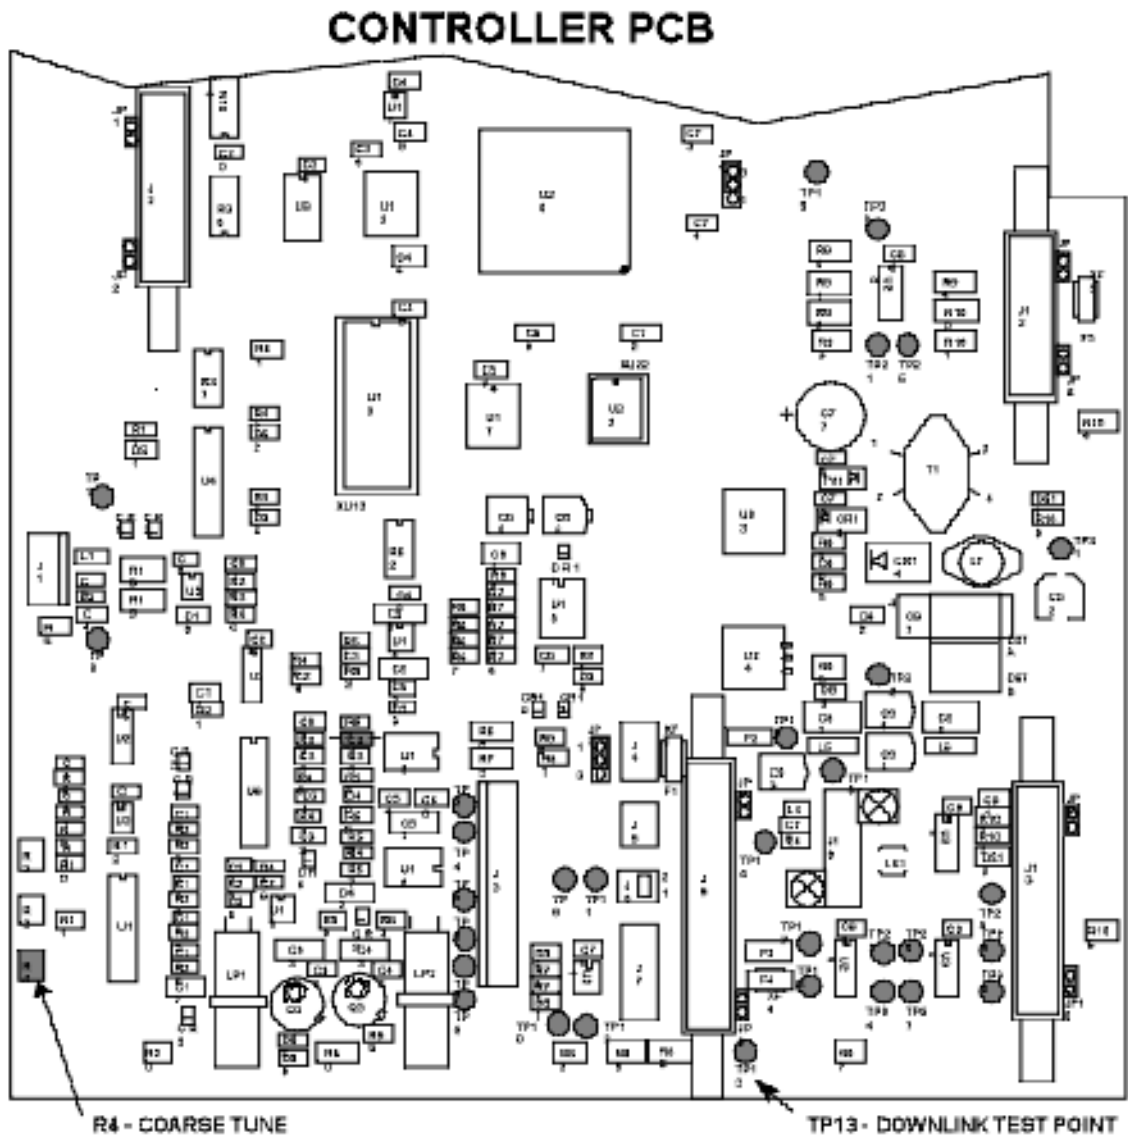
Controller PCB Coarse Tune Adjustment
